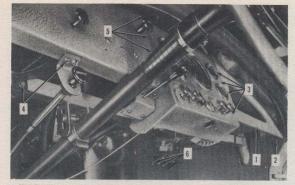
C-Instrument Panel Parts to be Loosened or Removed for Removal of Windshield Wiper Assembly.
